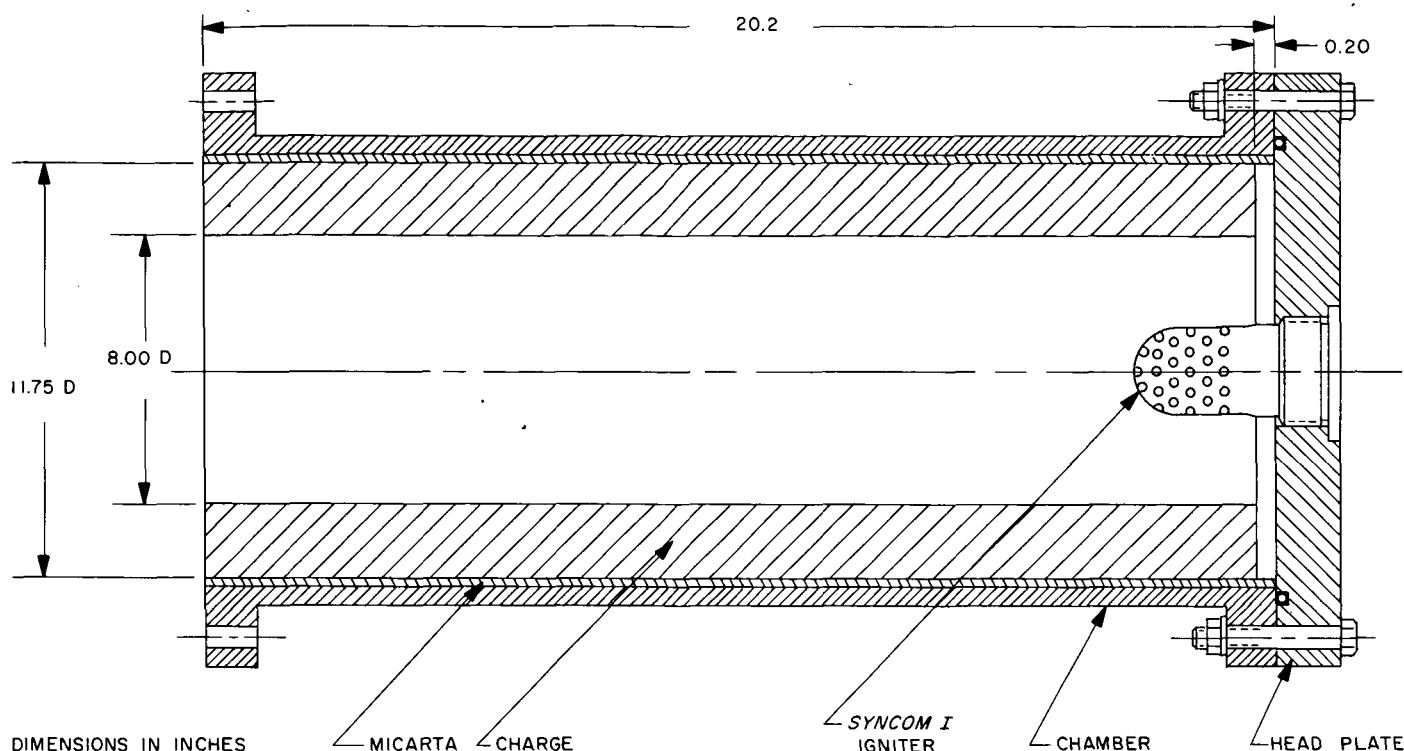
Chamber Syncom I igniter and charge configuration for BATES motor
